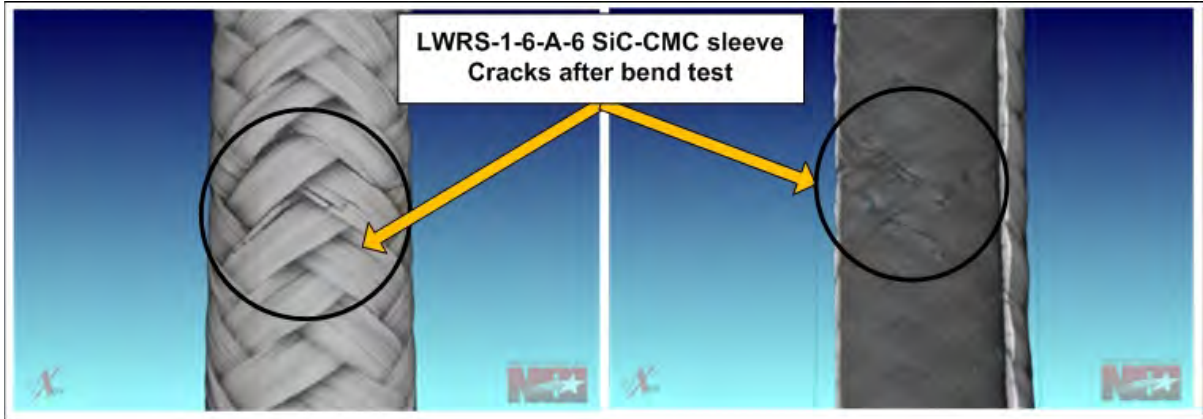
3D Tomography results of the 5 cycles, 1 ply (LWRS-1-6-A-6) SiC-CMC sleeve sample post bend testing showing cracks.
